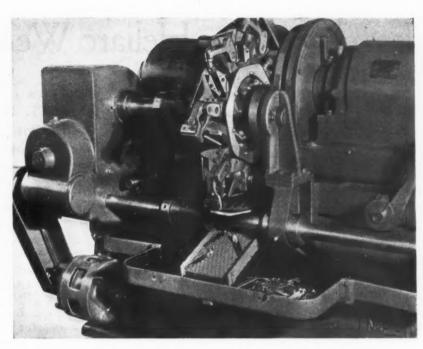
Eight-station, Automatic Indexing Fixture for Grinding Bevels to Form the Cutting Edges on Beer-can Openers
